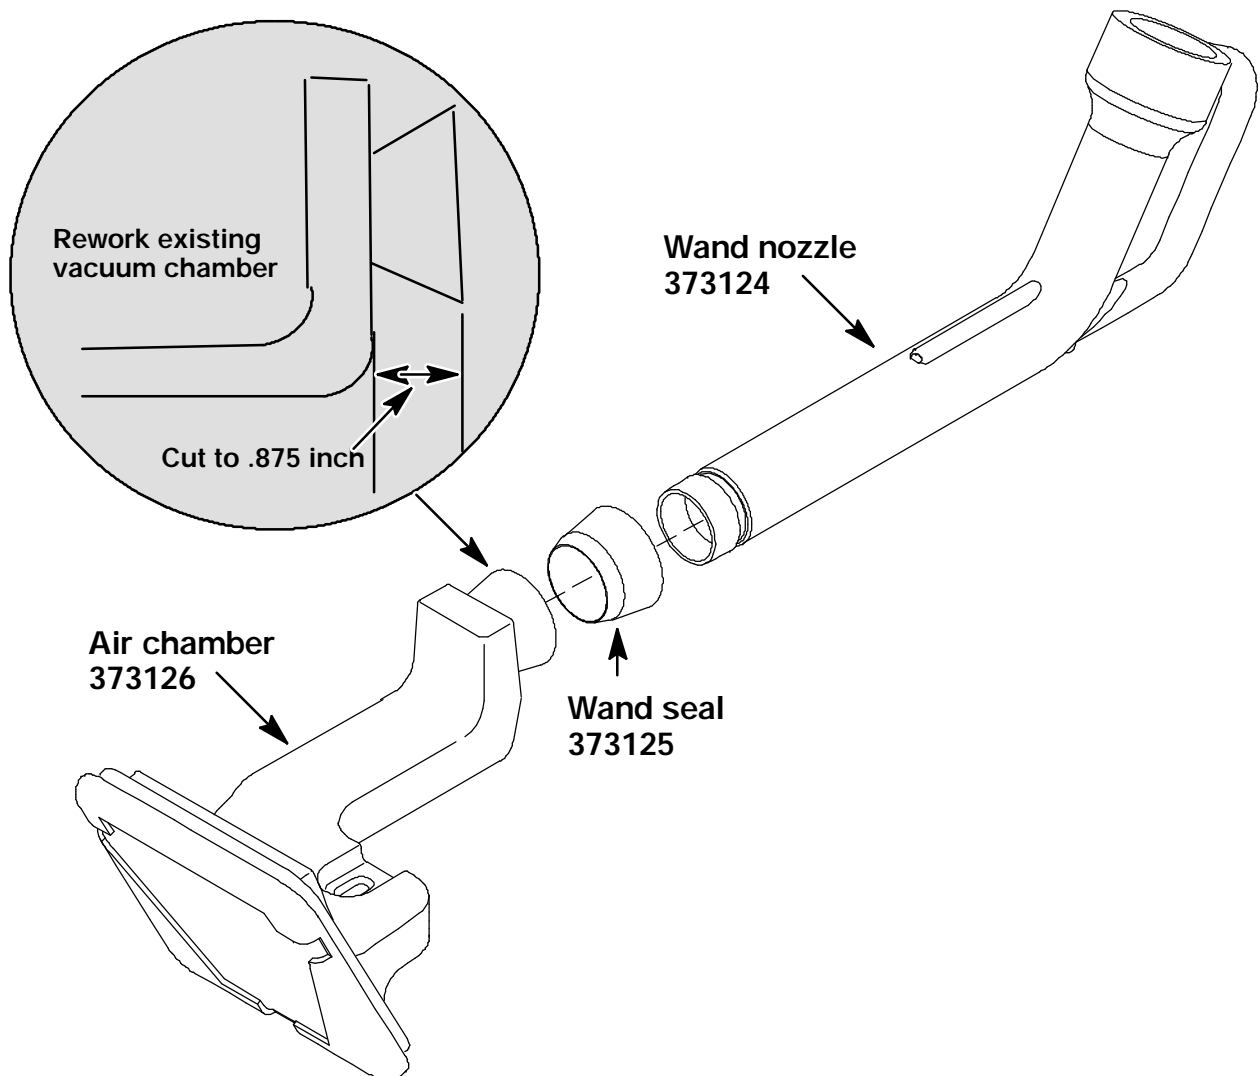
Vacuum Chamber, Seal, Wand, And Existing Chamber Rework
